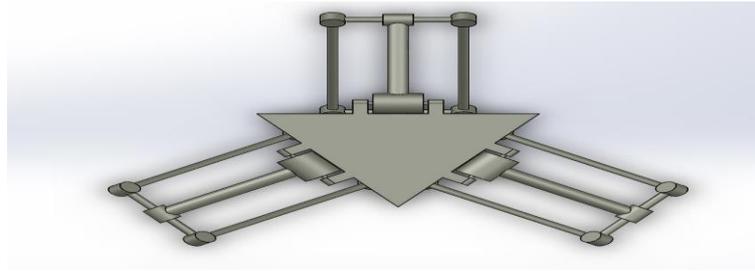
Top view of the Delta parallel Robot in SolidWorks
